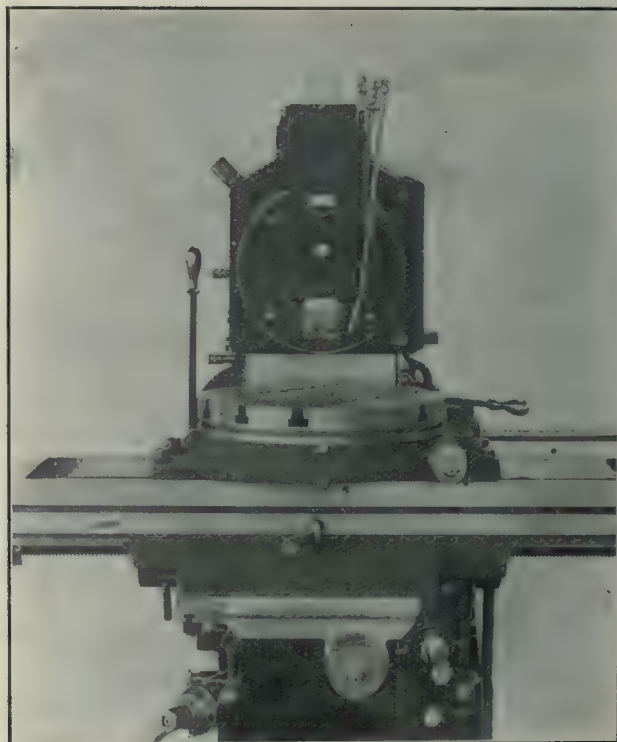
Slotting Attachment on Kearney & Trecker Milling Machine. Fig. 2.—Slotting Attachment on Kearney & Trecker's Milling Machine.
